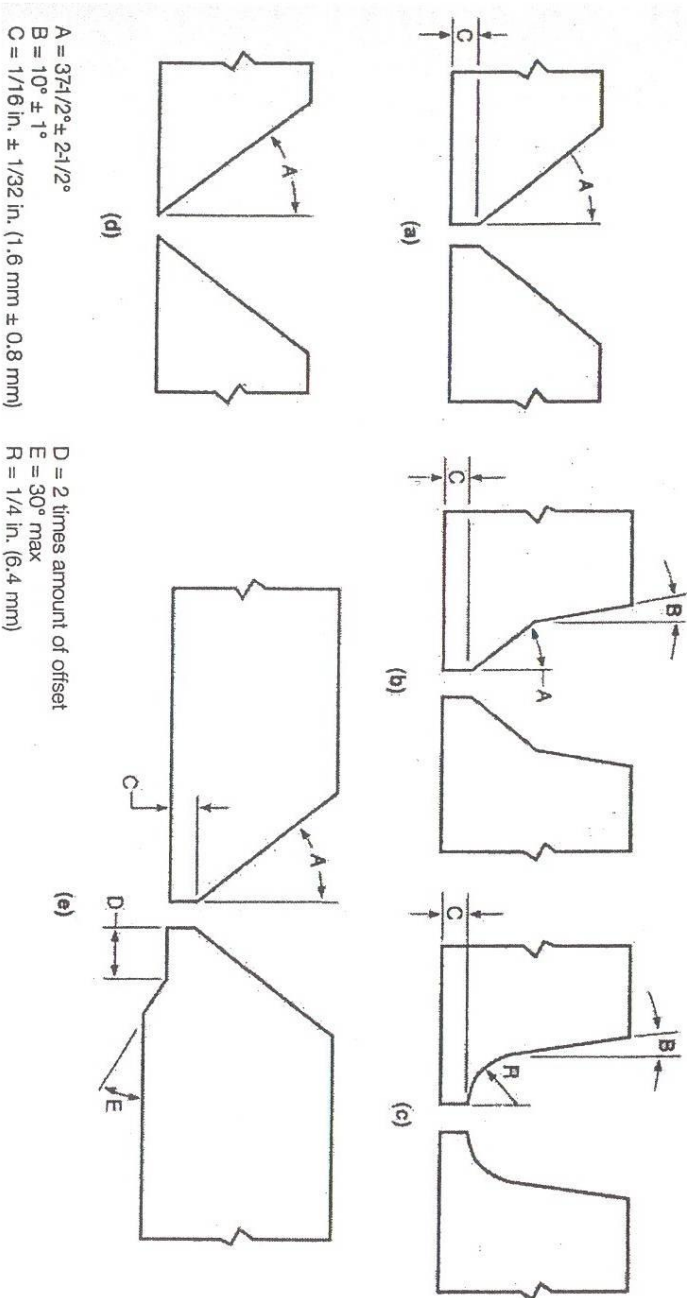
FIGURE — Typical joint designs for welding austenitic stainless steel pipe.
